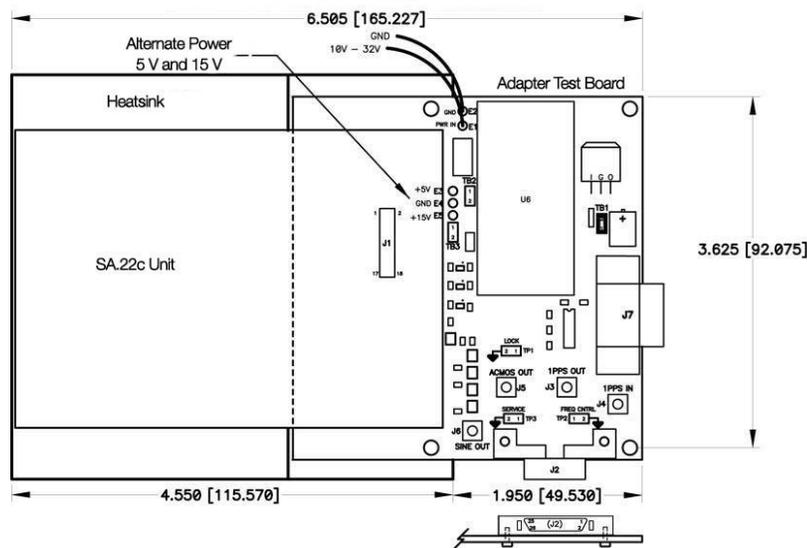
• SA.22c Developer's Kit with Heatsink Assembly
